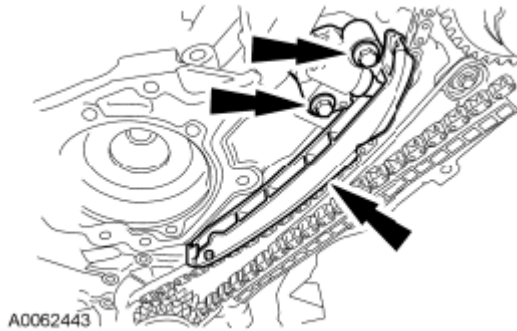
Locating LH Timing Chain Tensioner And Tensioner Arm Bolts
